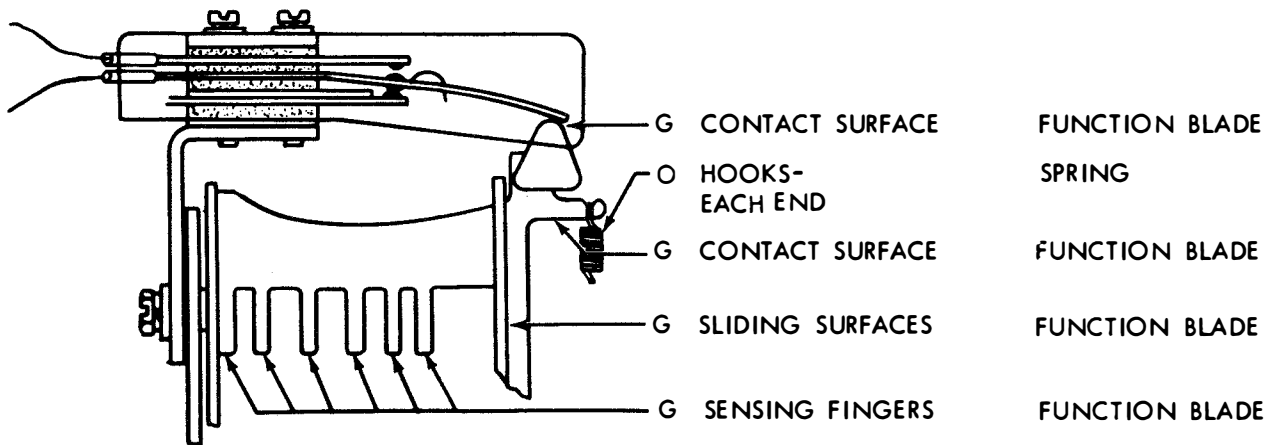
Signal Bell Contact Mechanism, Right Side View
